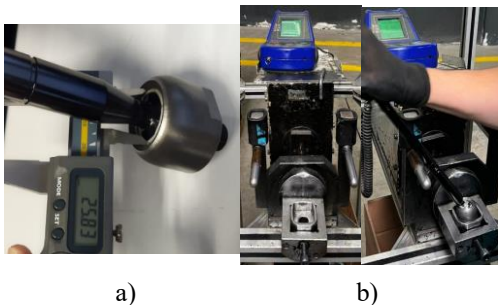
Measurement control of the inner tie-rod end stud a) Inner dimension size b) Controlling torque equipment
